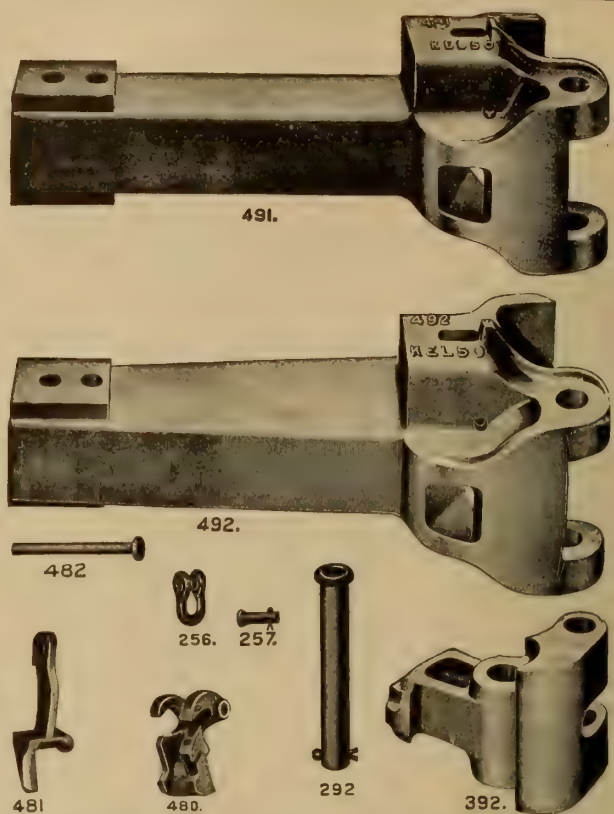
TOWER SIDE OPENING COUPLER AND PARTS.
